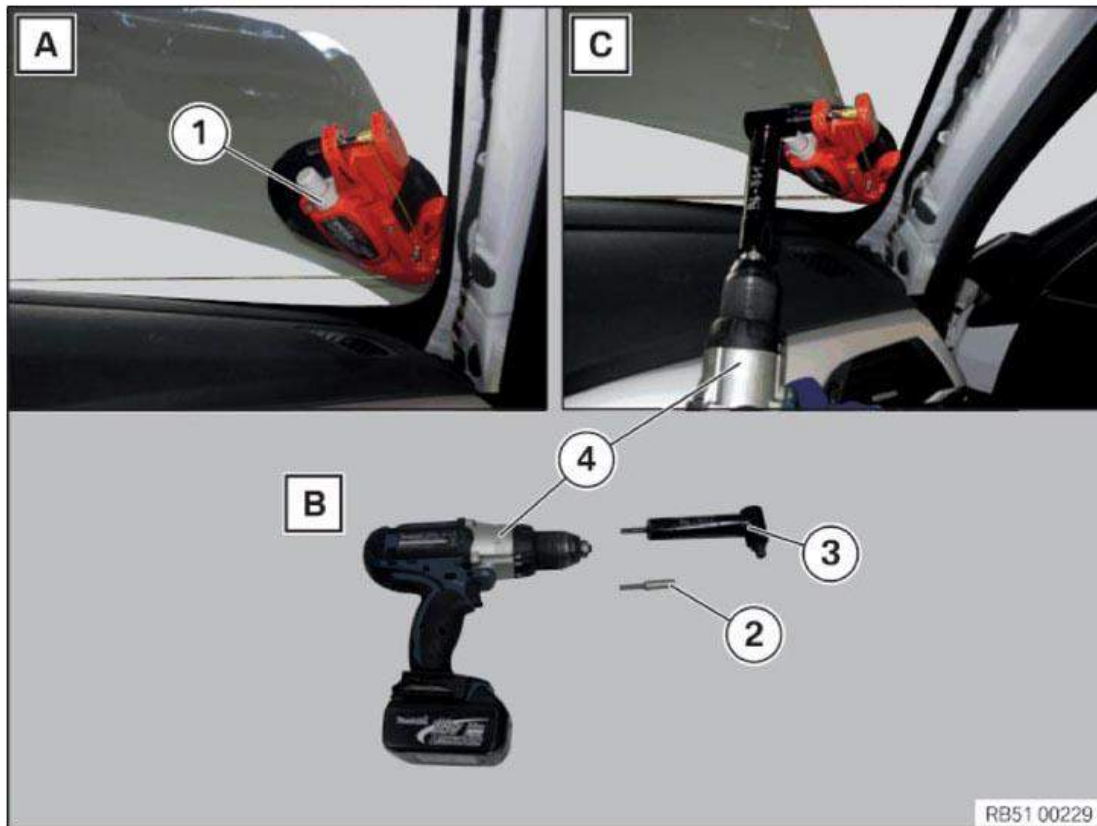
Identifying Separation Device, Bit Holder And Angle Gear
